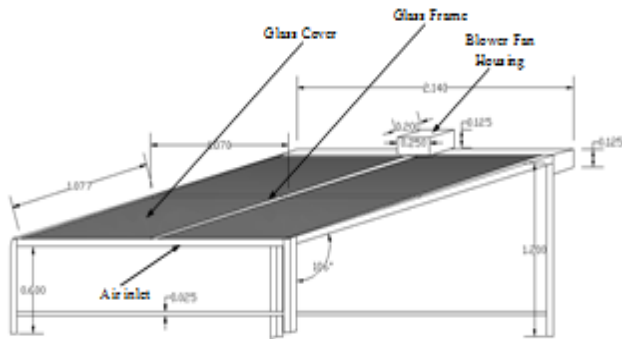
AutoCAD drawing of flat-plate air solar thermal collector
